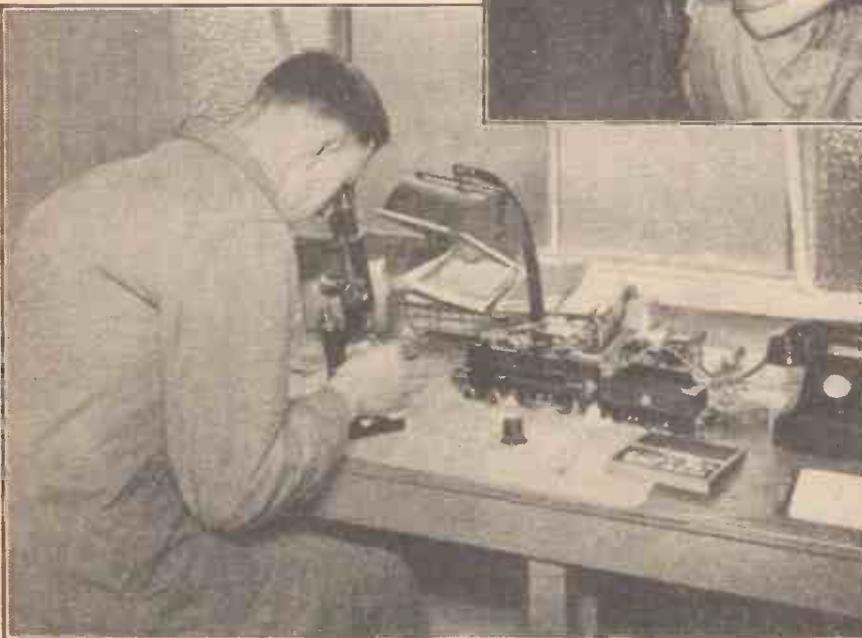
Microscopic examination of parts of the mechanism of a gauge O model locomotive.
